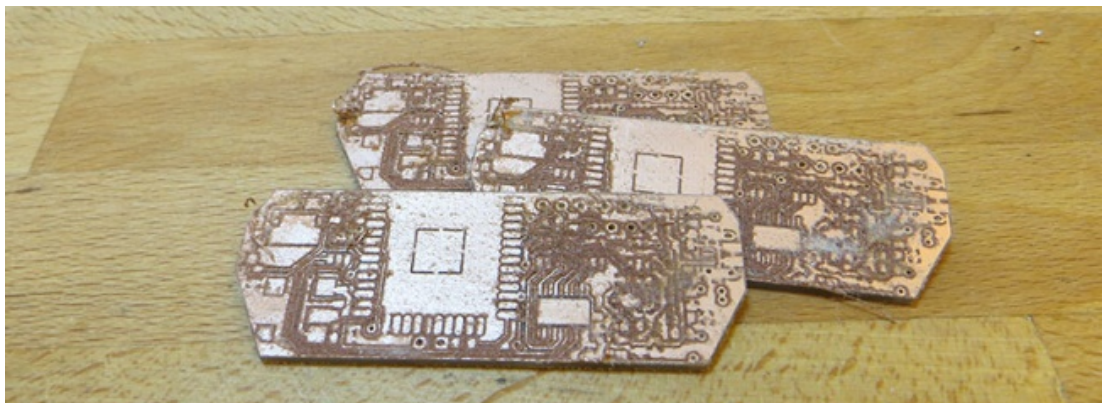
and 3. The CNC milling machine in action and the final PCBs.
